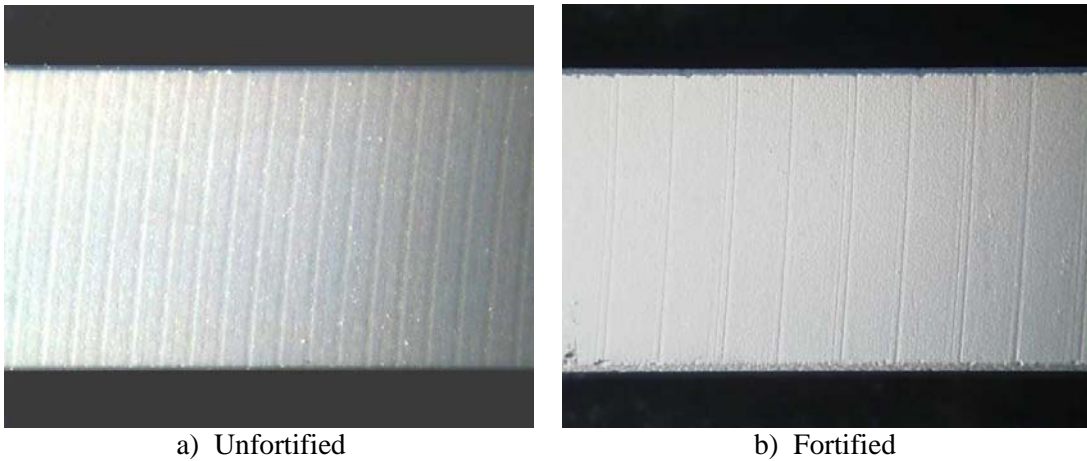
Surface appearances of as-received Pyroceram flexure specimens: (a) ‘Unfortified’ (as-machined) and (b) ‘fortified’ specimens. Machining marks are seen in both specimens; however, for the ‘fortified’ specimens, their machining marks were etched away from the specimens’ surfaces leaving a soft, protective layer.
